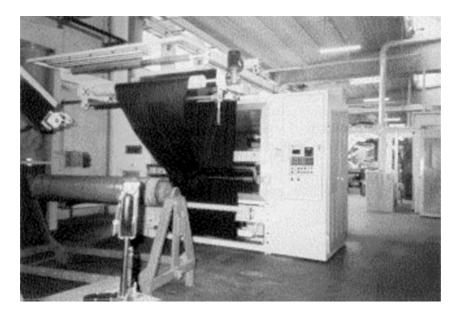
Raising machine equipped with 2 rotary drums, each featuring 24 rollers
